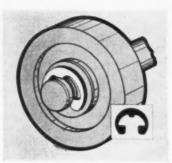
Waldes Truarc reinforced type E-ring used to secure small wheel on its shaft
